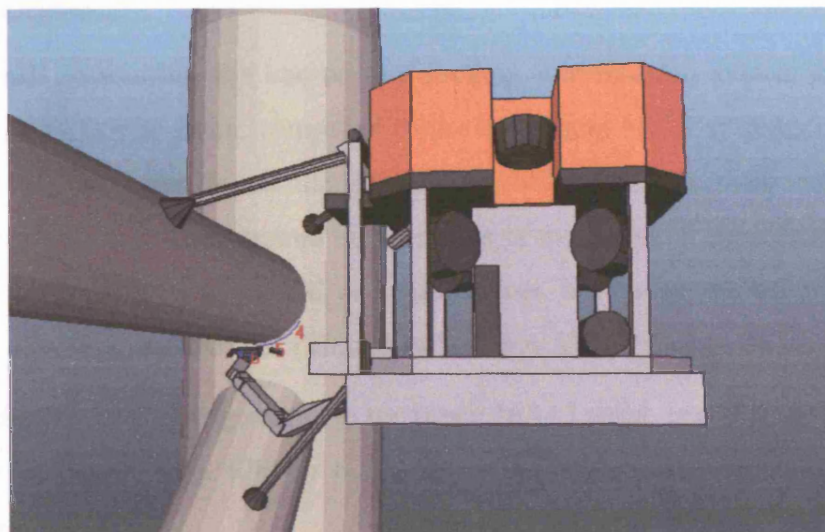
SSOL system inspecting 6 o'clock on weld 16A13; manipulator is mounted upside down
